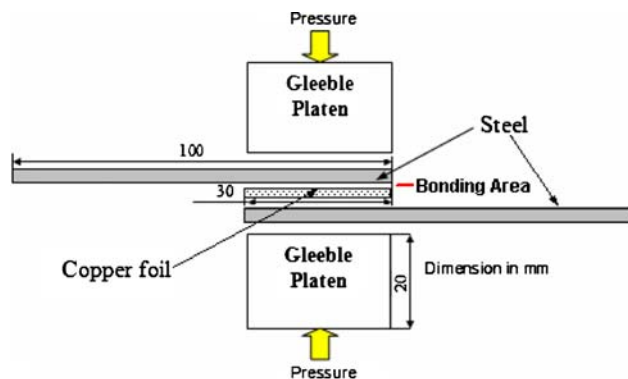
Geometrical configuration in bonding and dimensions of specimen
